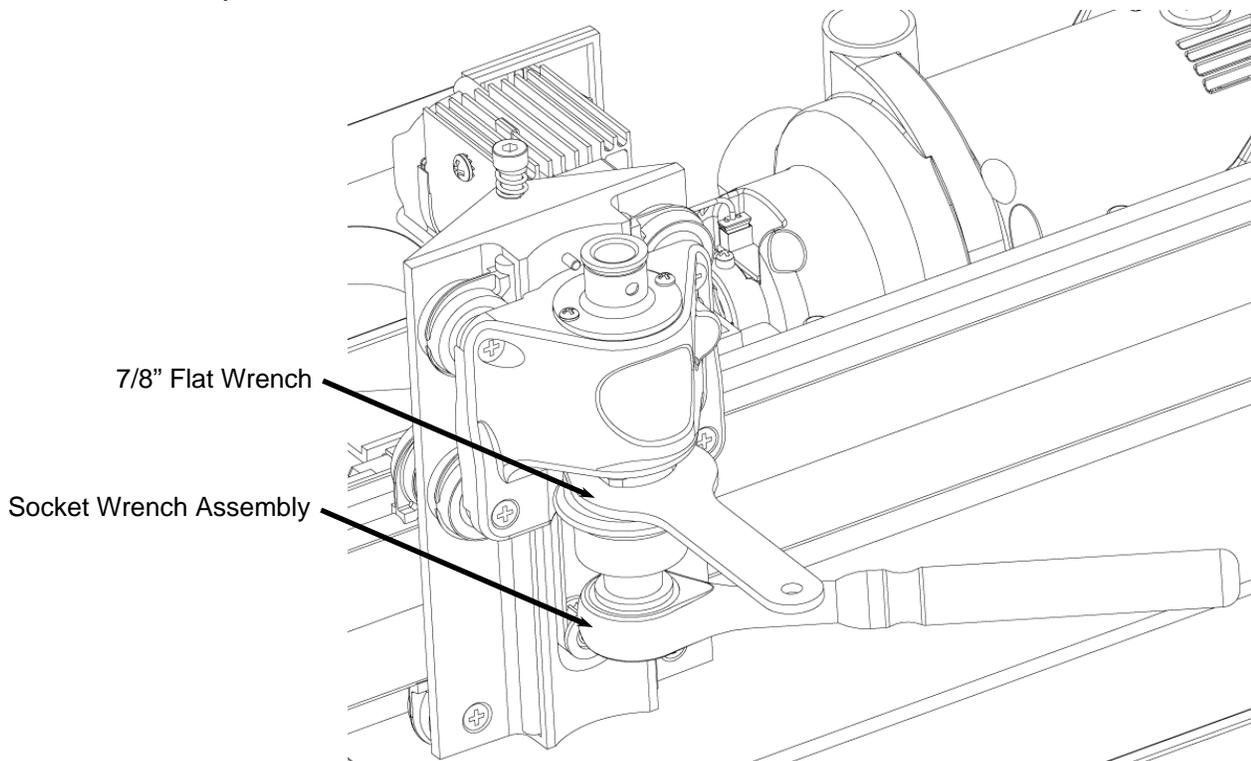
VIEW OF THE FLEXSHAFT CONNECTION TO THE Z-TRUCK
